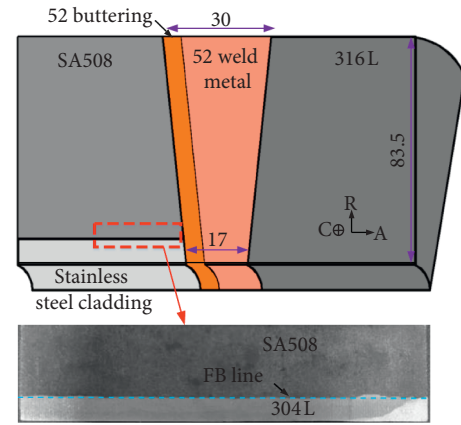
Stainless steel cladding layer specimen of welded joint of the pressure vessel (C, circumferential; R, radial direction; and A, axial direction).
